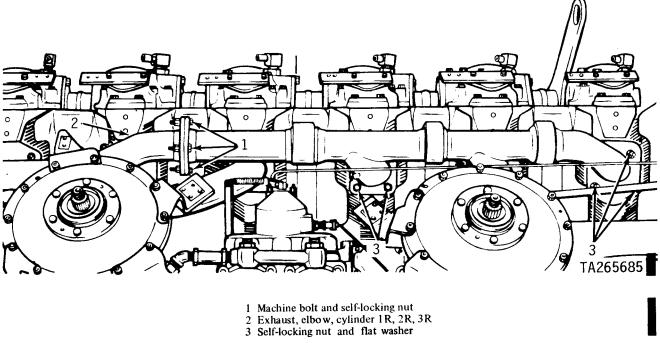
Removing or installing exhaust elbow and manifold cylinder Nos. IR, 2R and 3R.
